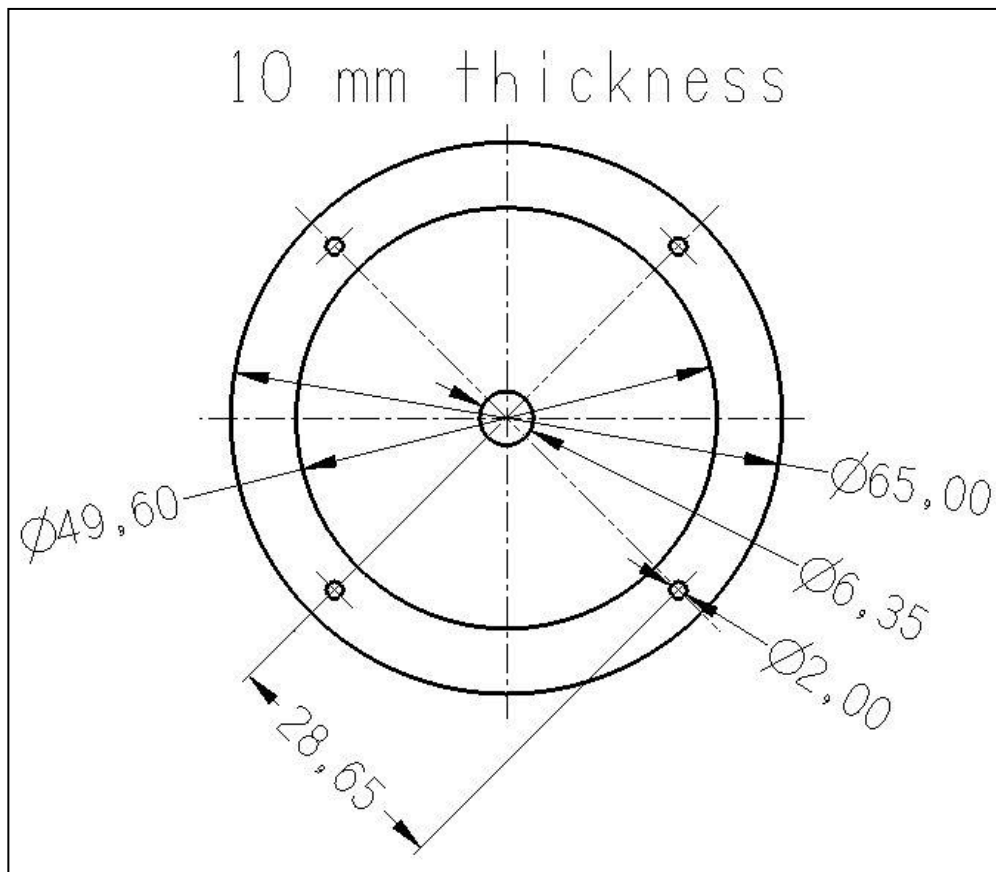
Technical drawing of the flange used for the 1st and 3rd minichannels
